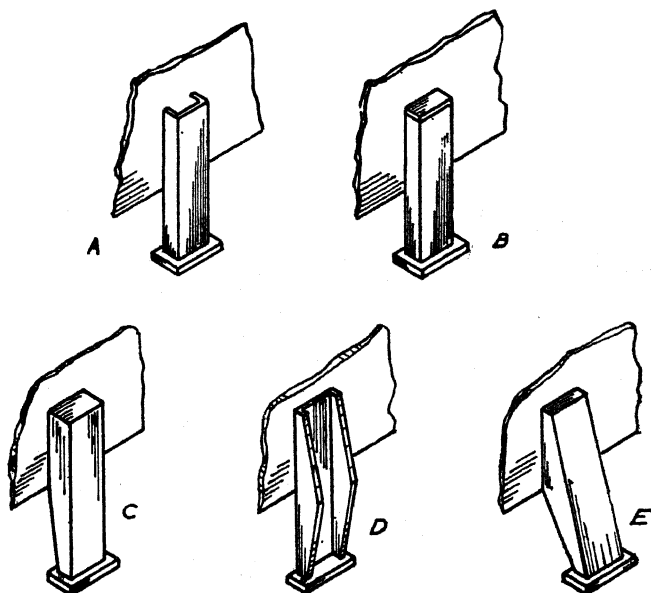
An assortment of designs of a support column to be welded to the side of a machine. (A) is not a particularly pleasing appearance. A cap over the top of the channel as shown in (B) improves the appearance. Another approach, with a slight taper of the channel is shown in (C). In (D) both ends of the flanges are tapered. (E) shows the same design with the flanges turned inward.
